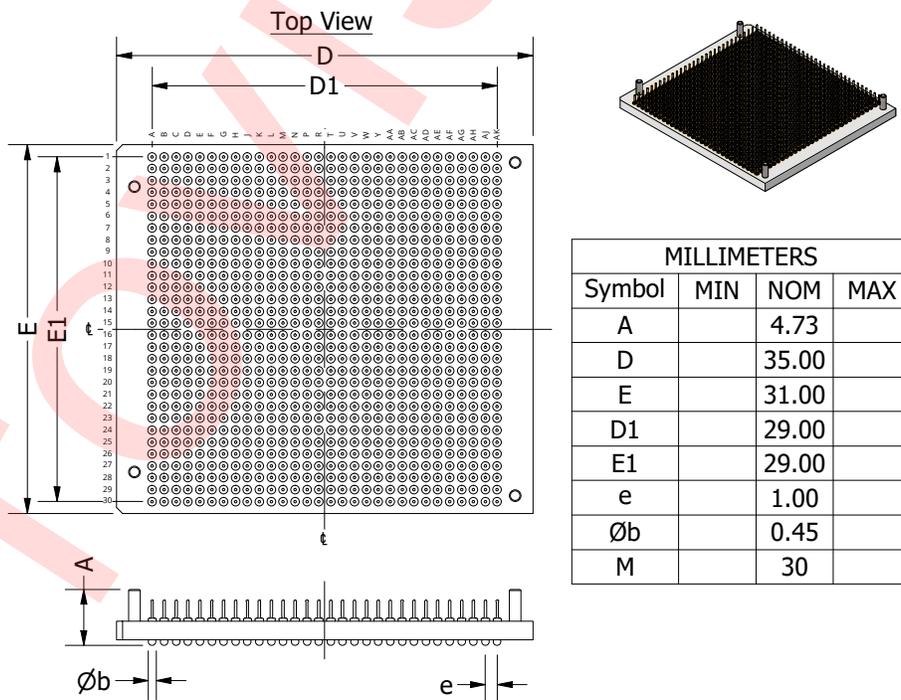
PactivR Male Socket Drawing - SCK-PACR-005 (SAC305), SCK-PACR-006 (SnPb)
